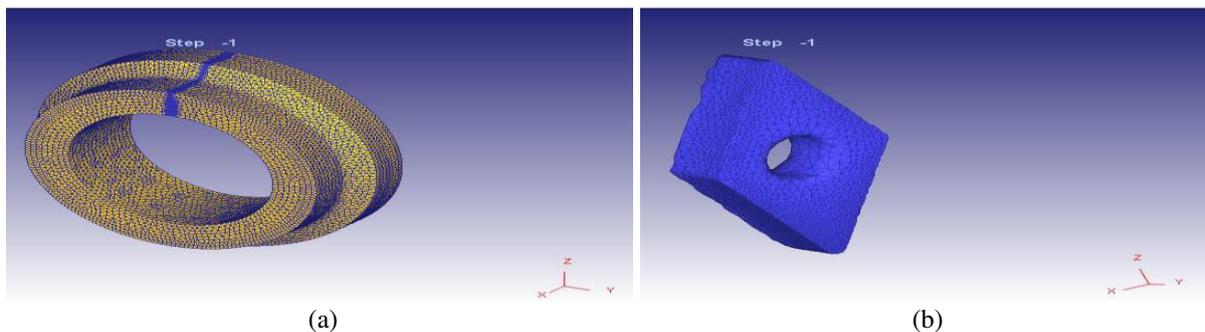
(a) Meshed workpiece and (b) cutting tool on DEFORM 3D.
